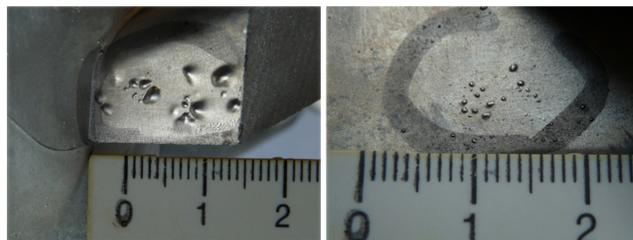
Specific defects of casting appearing after heat treatment
